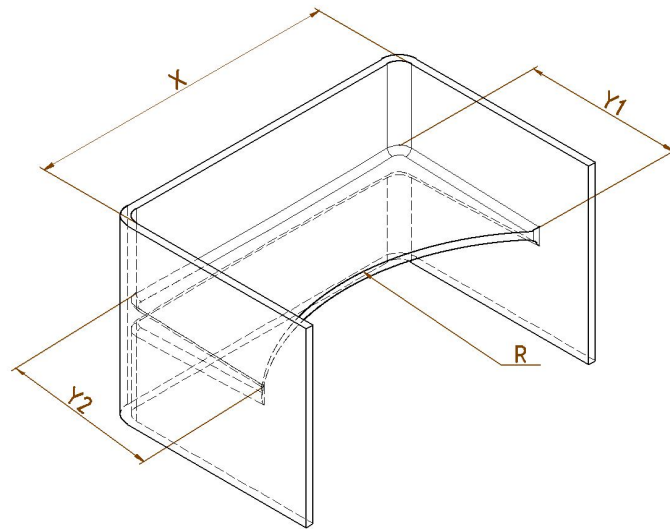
Drawing of model 2 single rib (M2 single) with the parameterized dimensions.
